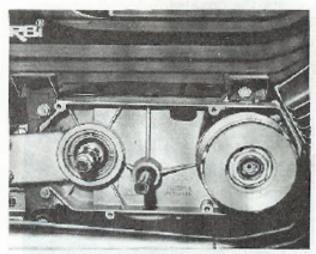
Driven putley inner spring will now push pulley off the shaft. NOTE: Exercise caution when removing this unit.
